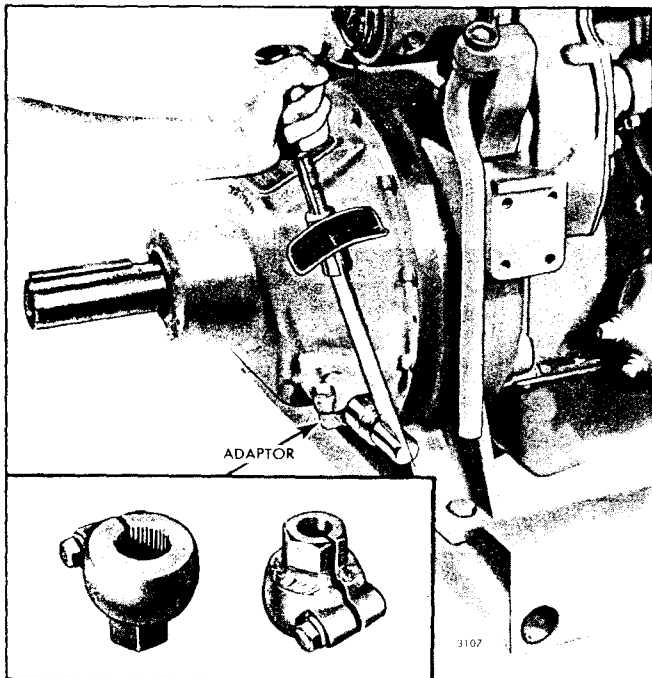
Checking Power Take-Off Clutch Adjustment with a Torque Wrench and an Adaptor
